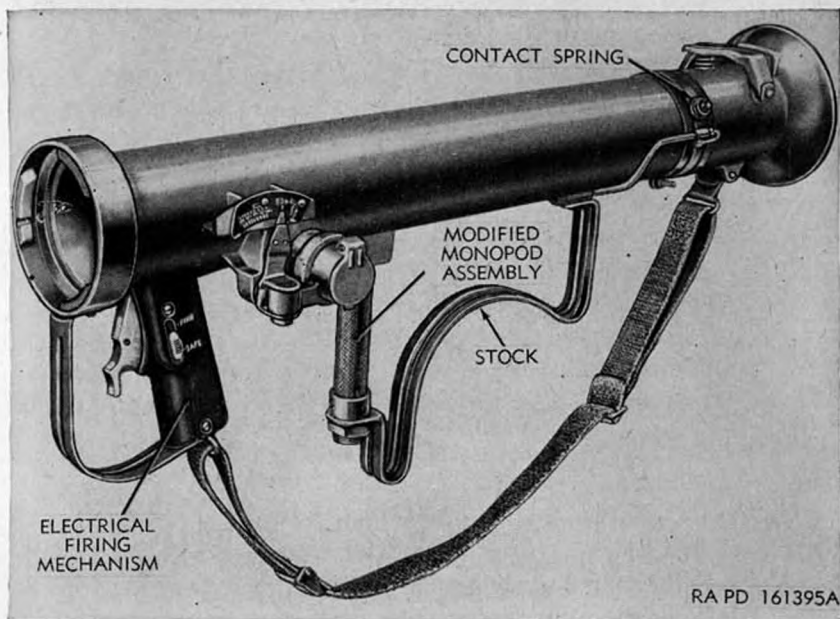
Rear barrel of launcher M20B1 (early manufacture)—
